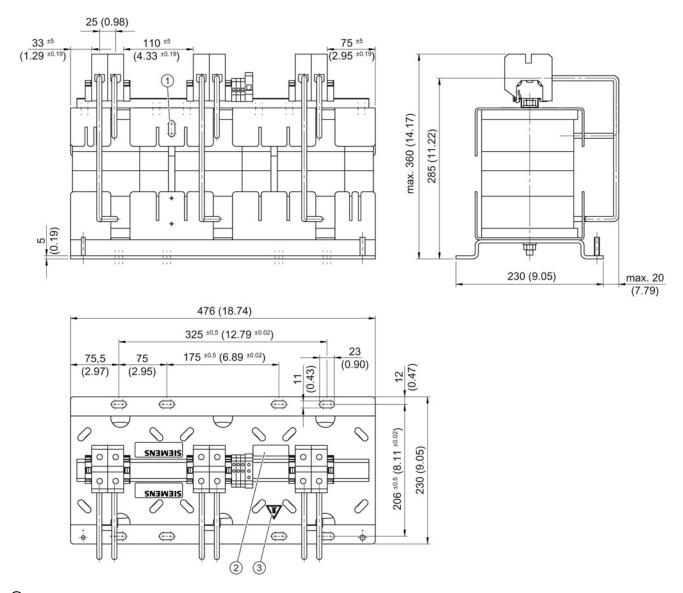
Dimension drawing of HFD line reactor 55 kW, all dimensions in mm and (inches)
